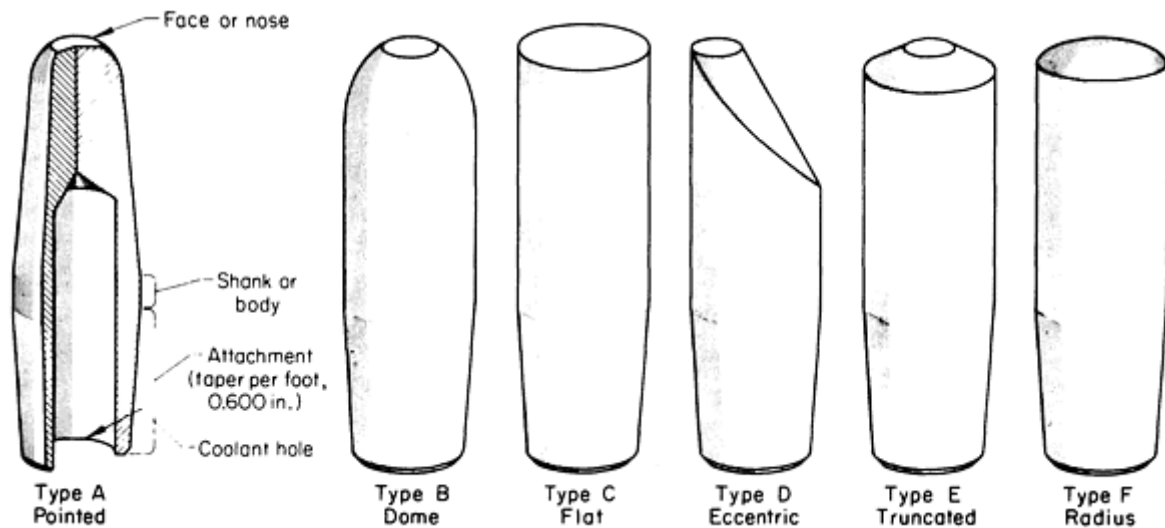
STANDARD-RESISTANCE SPOT WELDING ELECTRODE FACE AND NOSE CONFIGURATIONS
